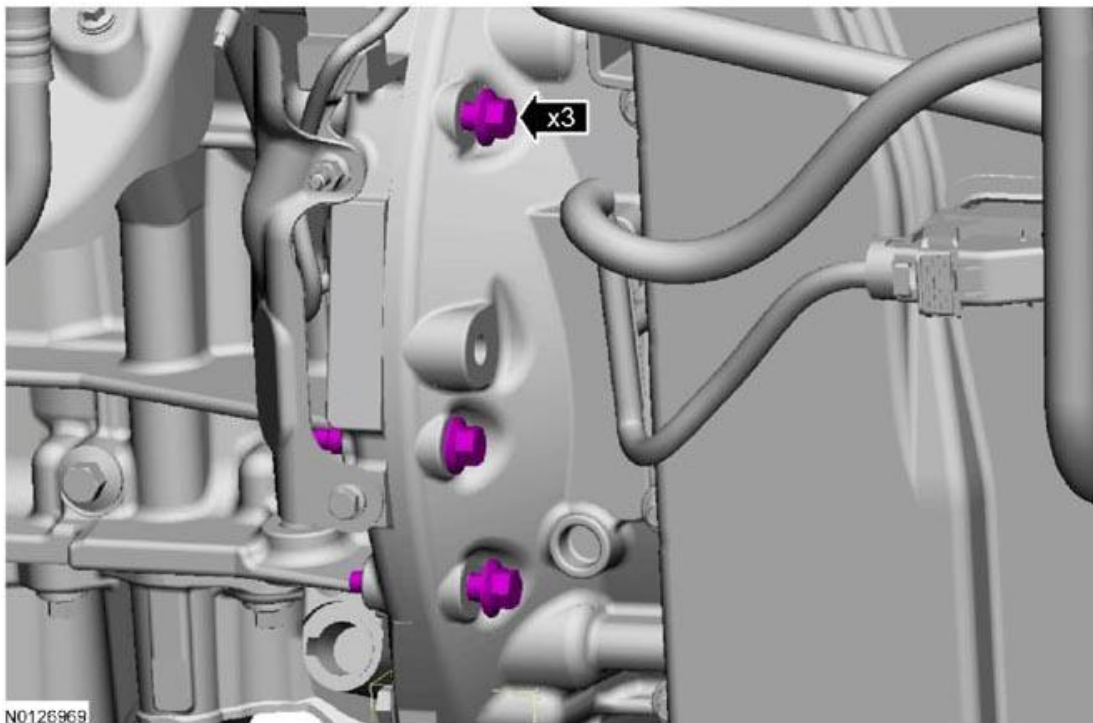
Identifying Catalytic Converter Manifold Nuts Tightening Sequence
